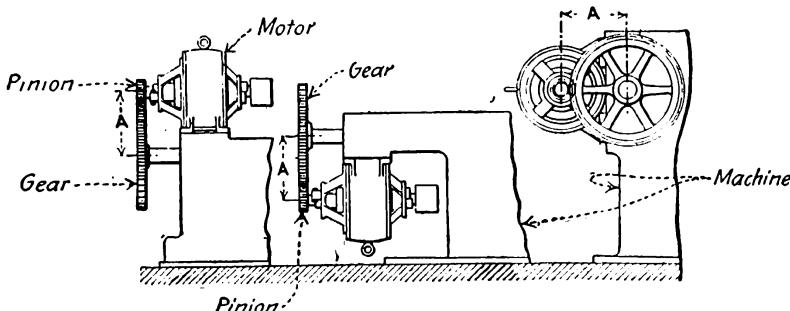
Motor mountings for gear drive (distances between gear centers limited).
